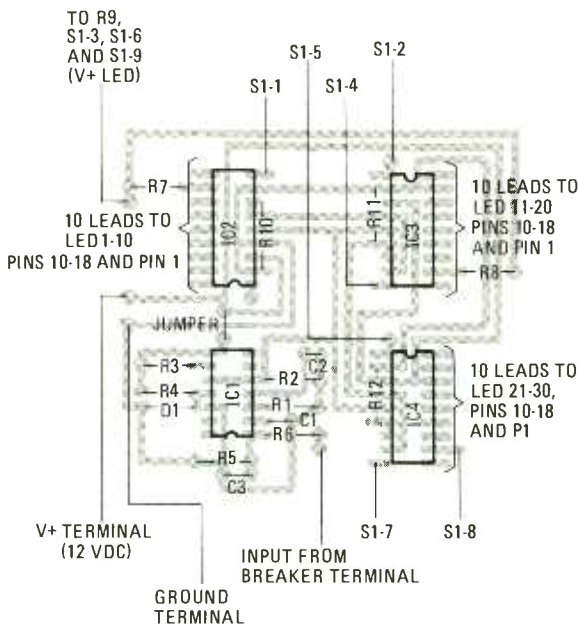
COMPONENT-LOCATION GUIDE for the circuit board. Follow it carefully. Be sure that you insert all parts correctly.
